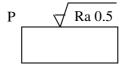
Example of tolerance indication on technical drawing
